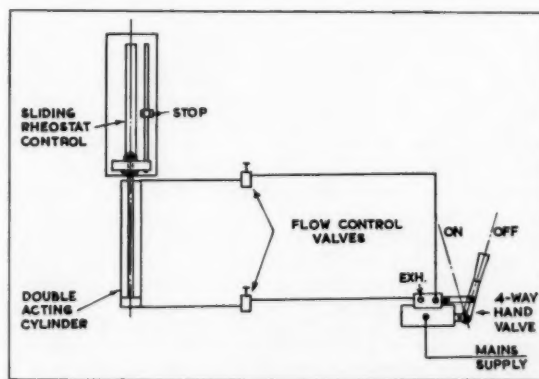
Valve and double-acting cylinder for control of sliding rheostat
